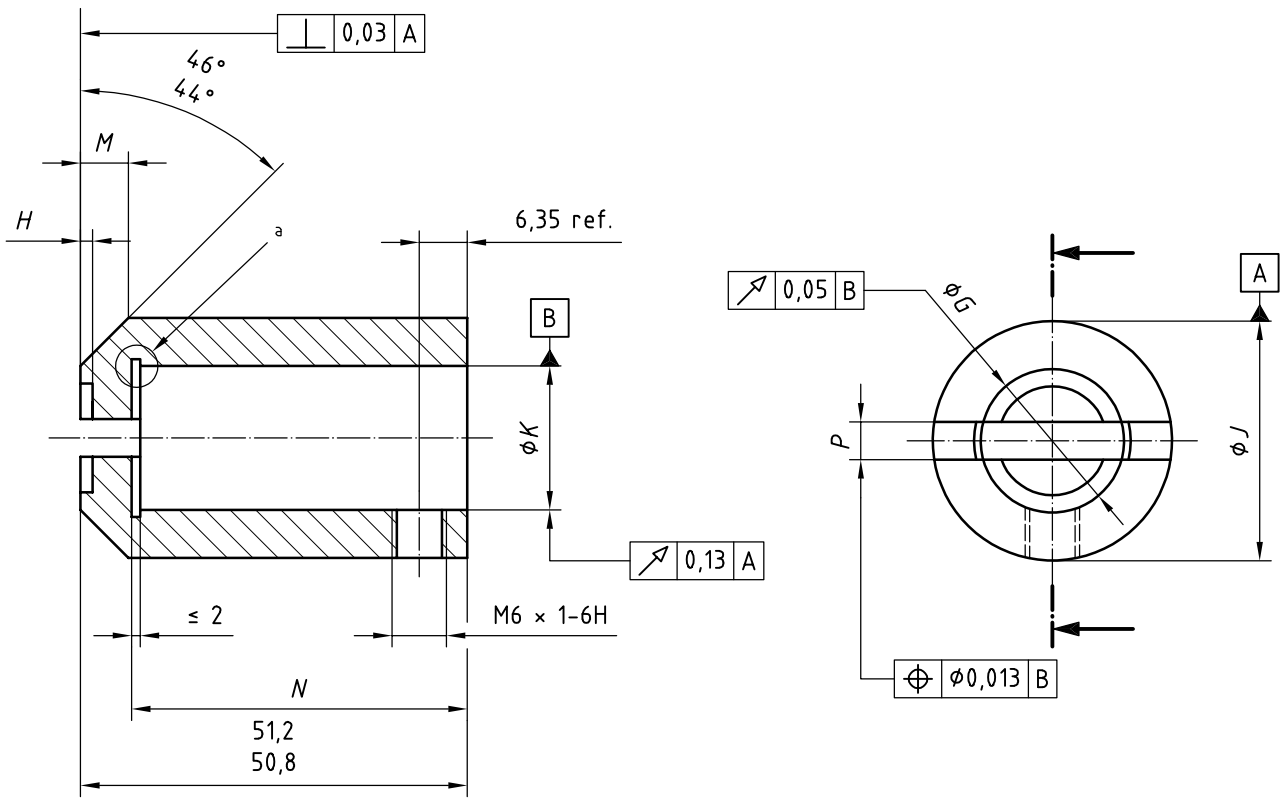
Configuration — Drive GO (A) and NOT GO (C) gauges
